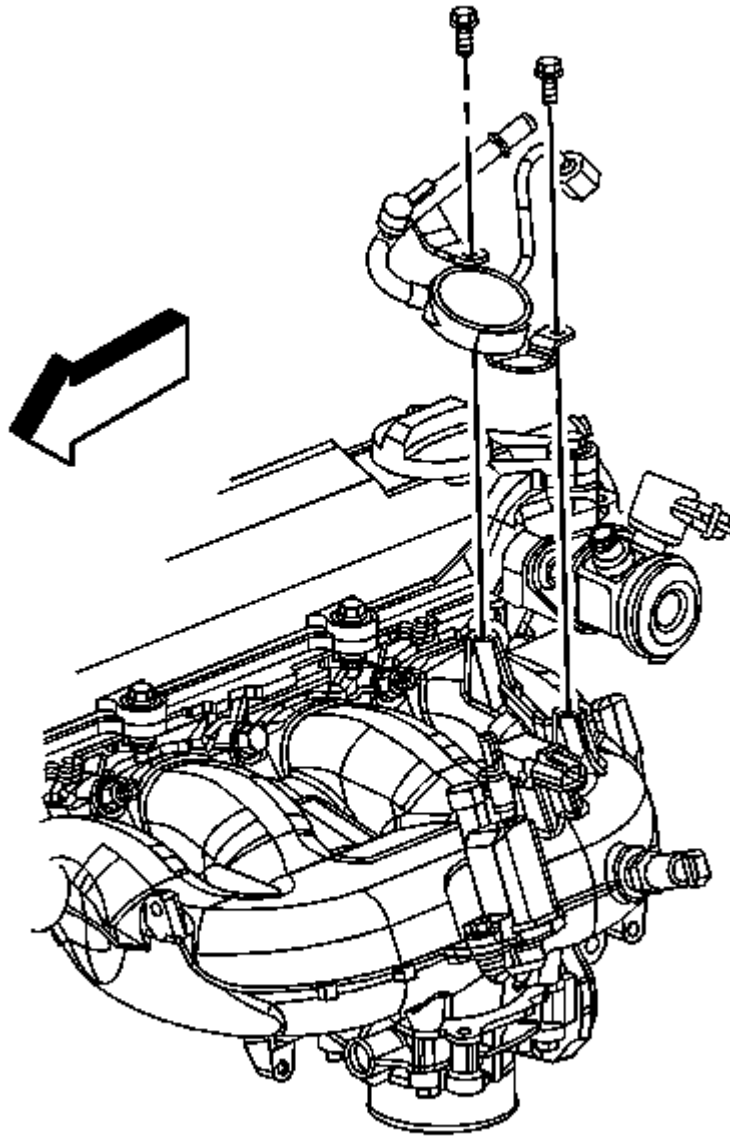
Identifying Fuel Feed Pipe & Bolts
